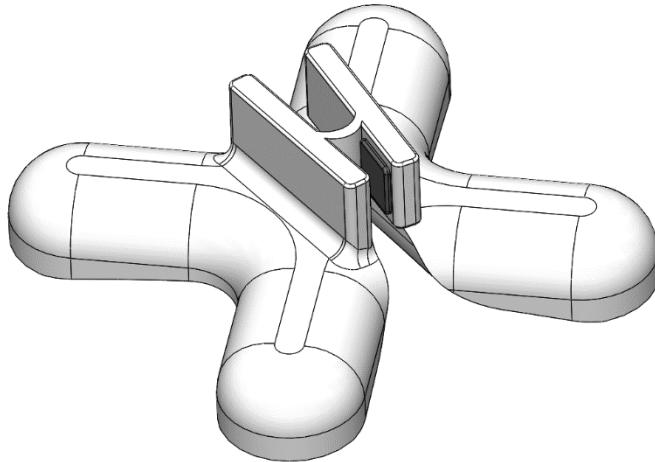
CAD model of the Back Stabilizer assembly
